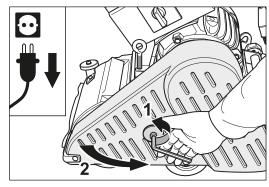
Pull the power plug out of the socket and open the belt guard.
